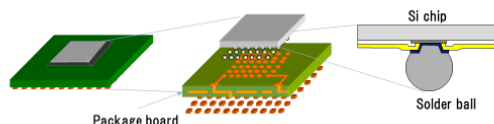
Solder connection technology so called C4 (Controlled Collapse Chip Connection)
